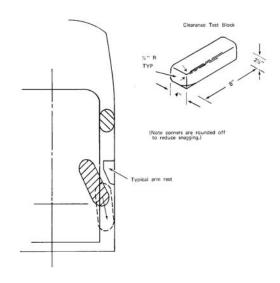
USE OF CLEARANCE TEST BLOCK TO DETERMINE HAND/ARM ACCESS
